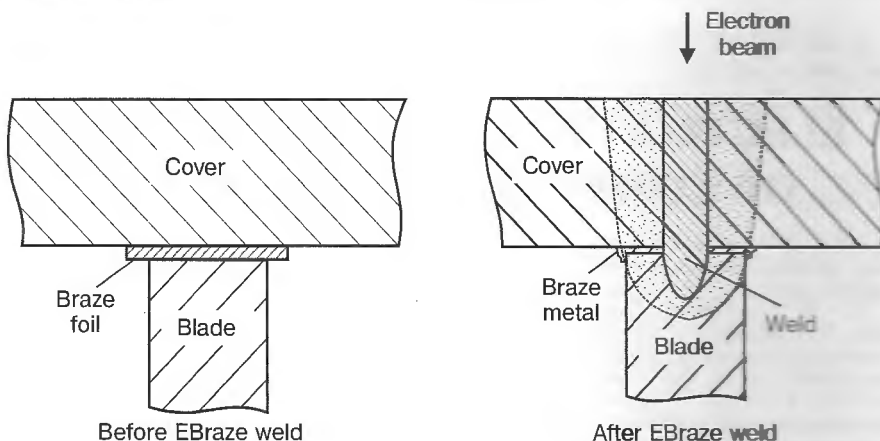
Expected configuration of a typical EBraze welded joint
